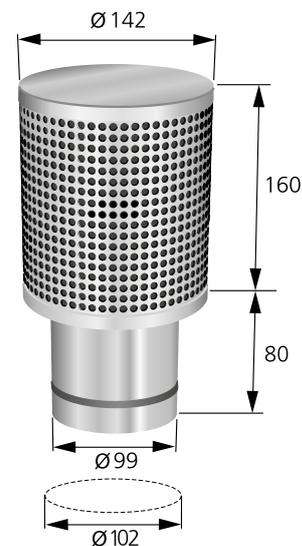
DCC. Unit of measure = mm. Weight: 1.2 kg. Cutout dimension = Ø102 mm.
